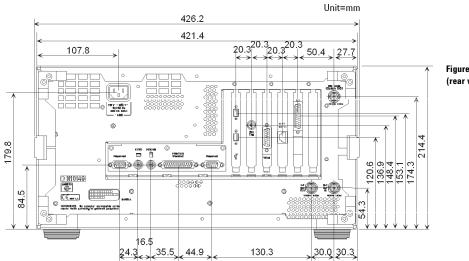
Main unit dimensions (rear view, in millimeters, nominal)
